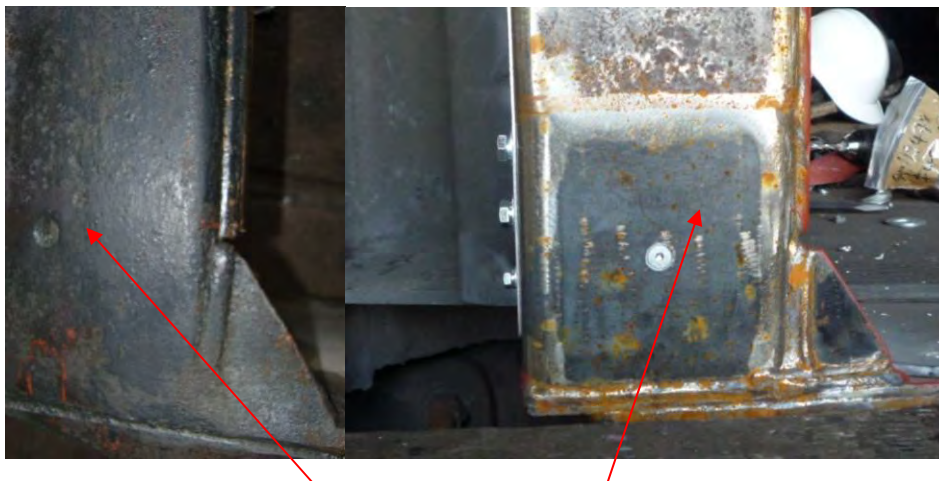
The left hand photo shows the standard arrangement not strengthened, the right hand photo shows the area strengthened.
